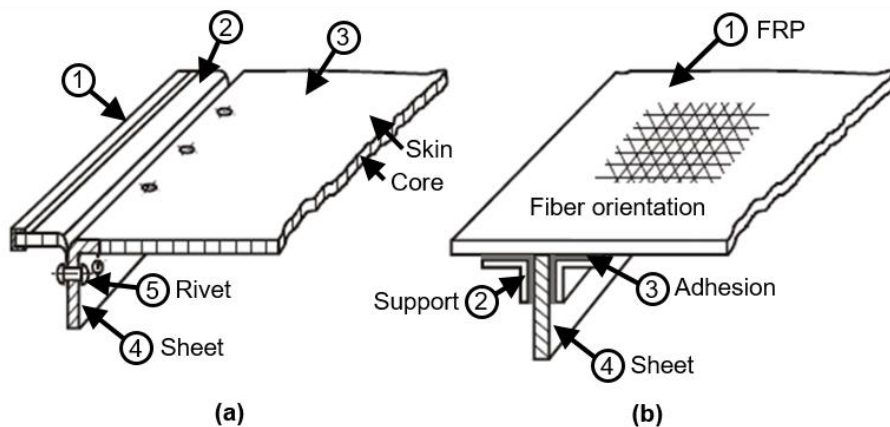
Basic principles of hybrid/multi-material construction: a) sandwich construction; b) FRP-metal hybrid construction [63]
